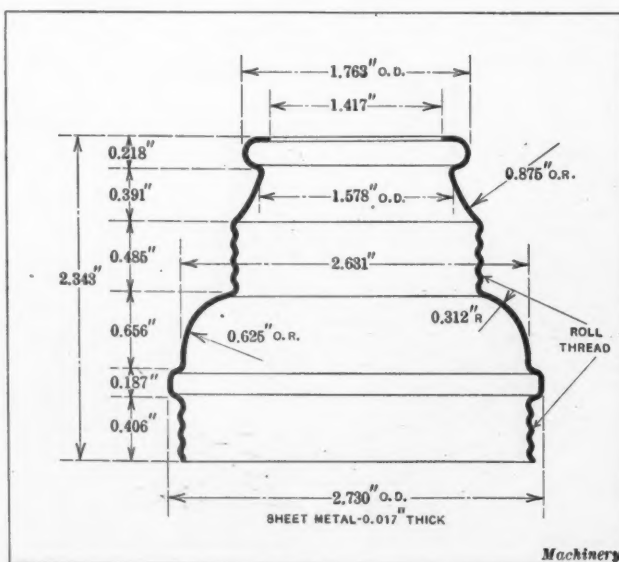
Fully Dimensioned Illustration of the Finished Shell
